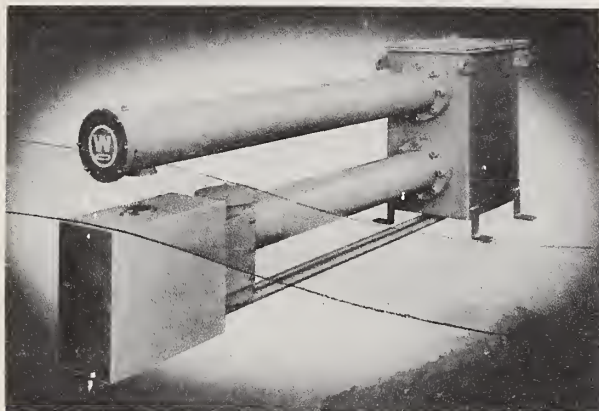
Westinghouse X-ray thickness gage for cold-rolled steel strip.
